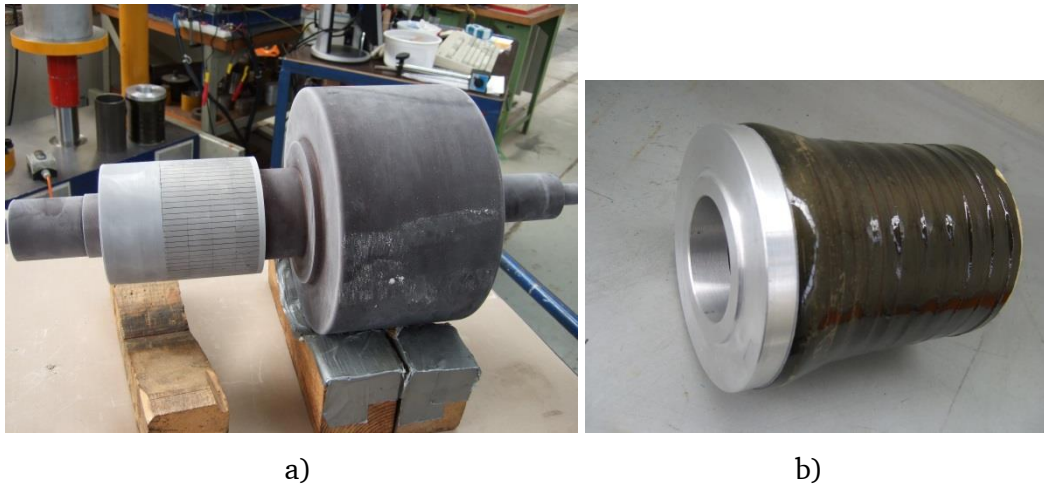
Cold flywheel rotor and carbon fiber bandage prepared for mounting: a) cold flywheel rotor with glued magnets, b) bandage sleeve
